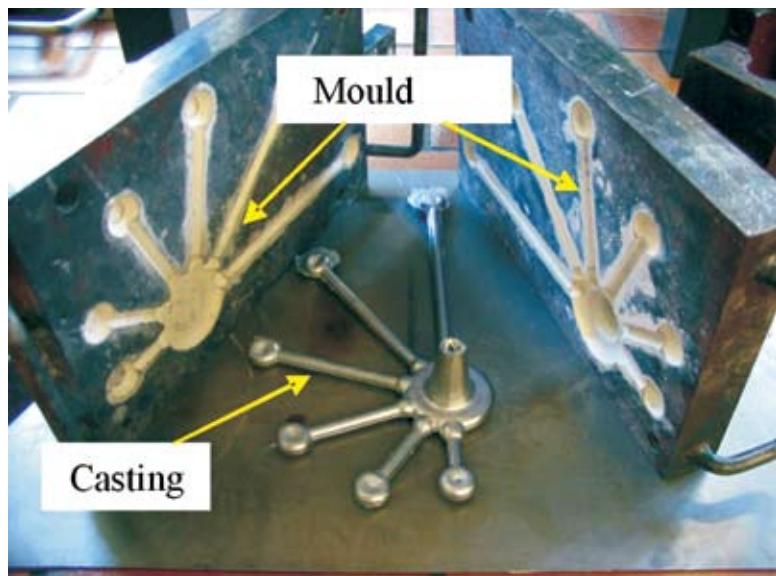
Star mould for assessment of hot cracking behaviour with star casting
